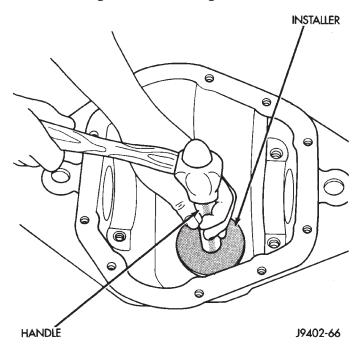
Pinion Rear Bearing Cup Installation refer to Pinion Gear Depth to select the proper thickness shim before installing rear pinion bearing.
